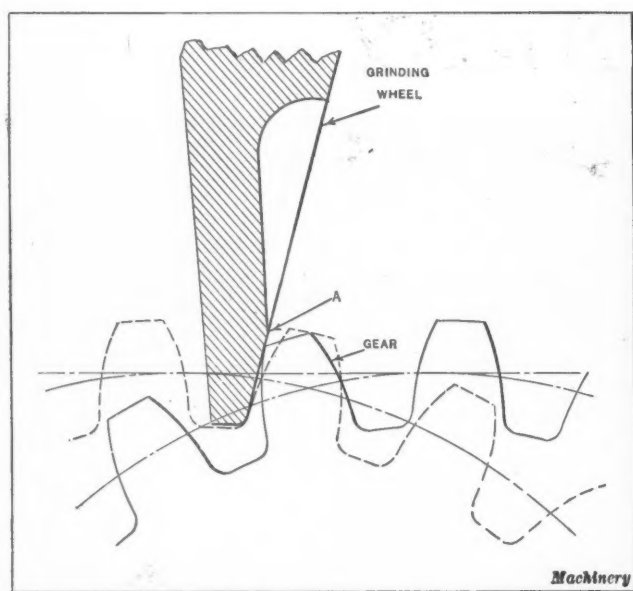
Action of Gear Relative to Grinding Wheel on Machine of Generating Type
